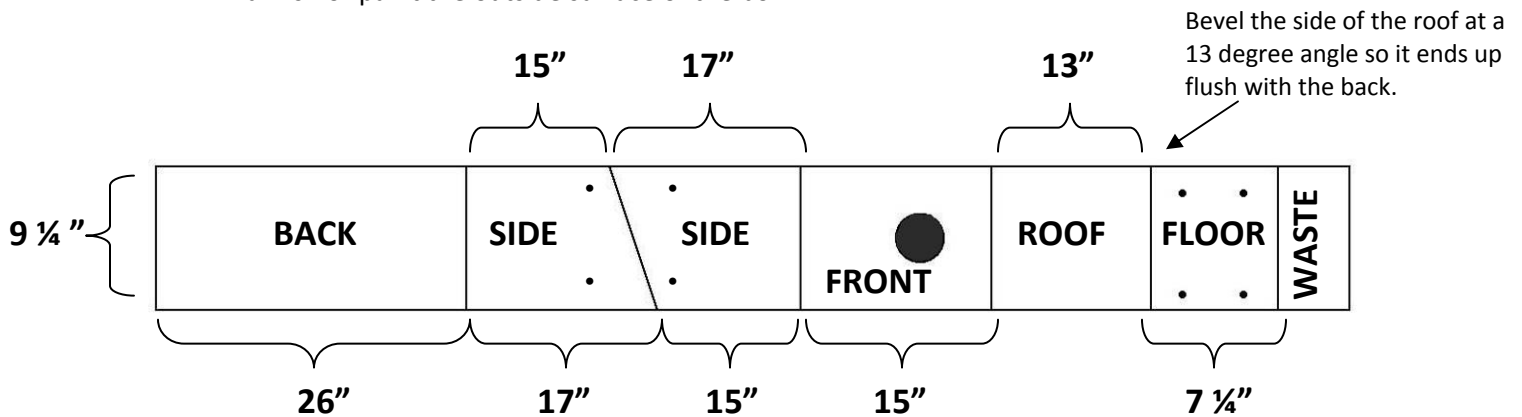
A 1" thick board should be cut to the above specified measurements. If you elect to use ¾" or ½" plywood, you will need to adjust the measurement of the floor accordingly.
